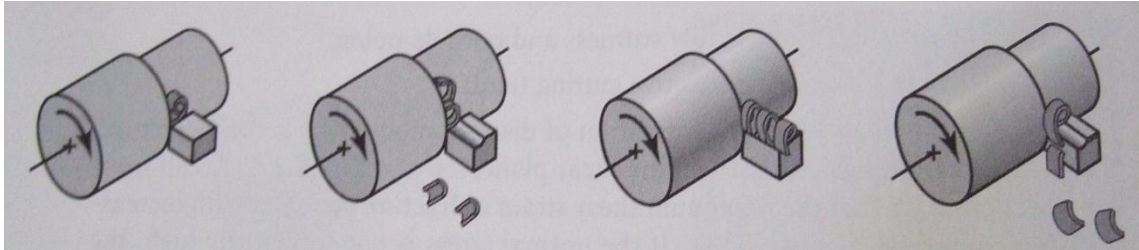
Different geometrical shapes that can be formed from the machining process [17].
